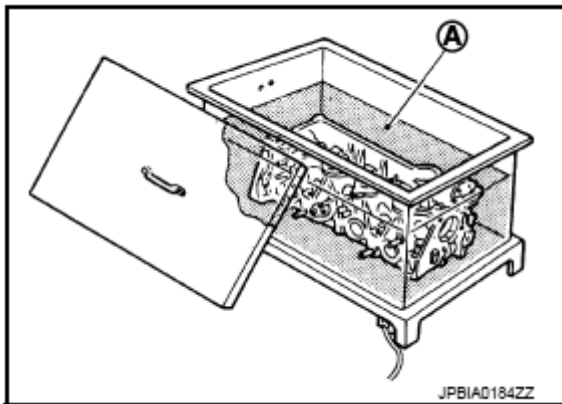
Heating Cylinder Head To Remove Valve Guide
